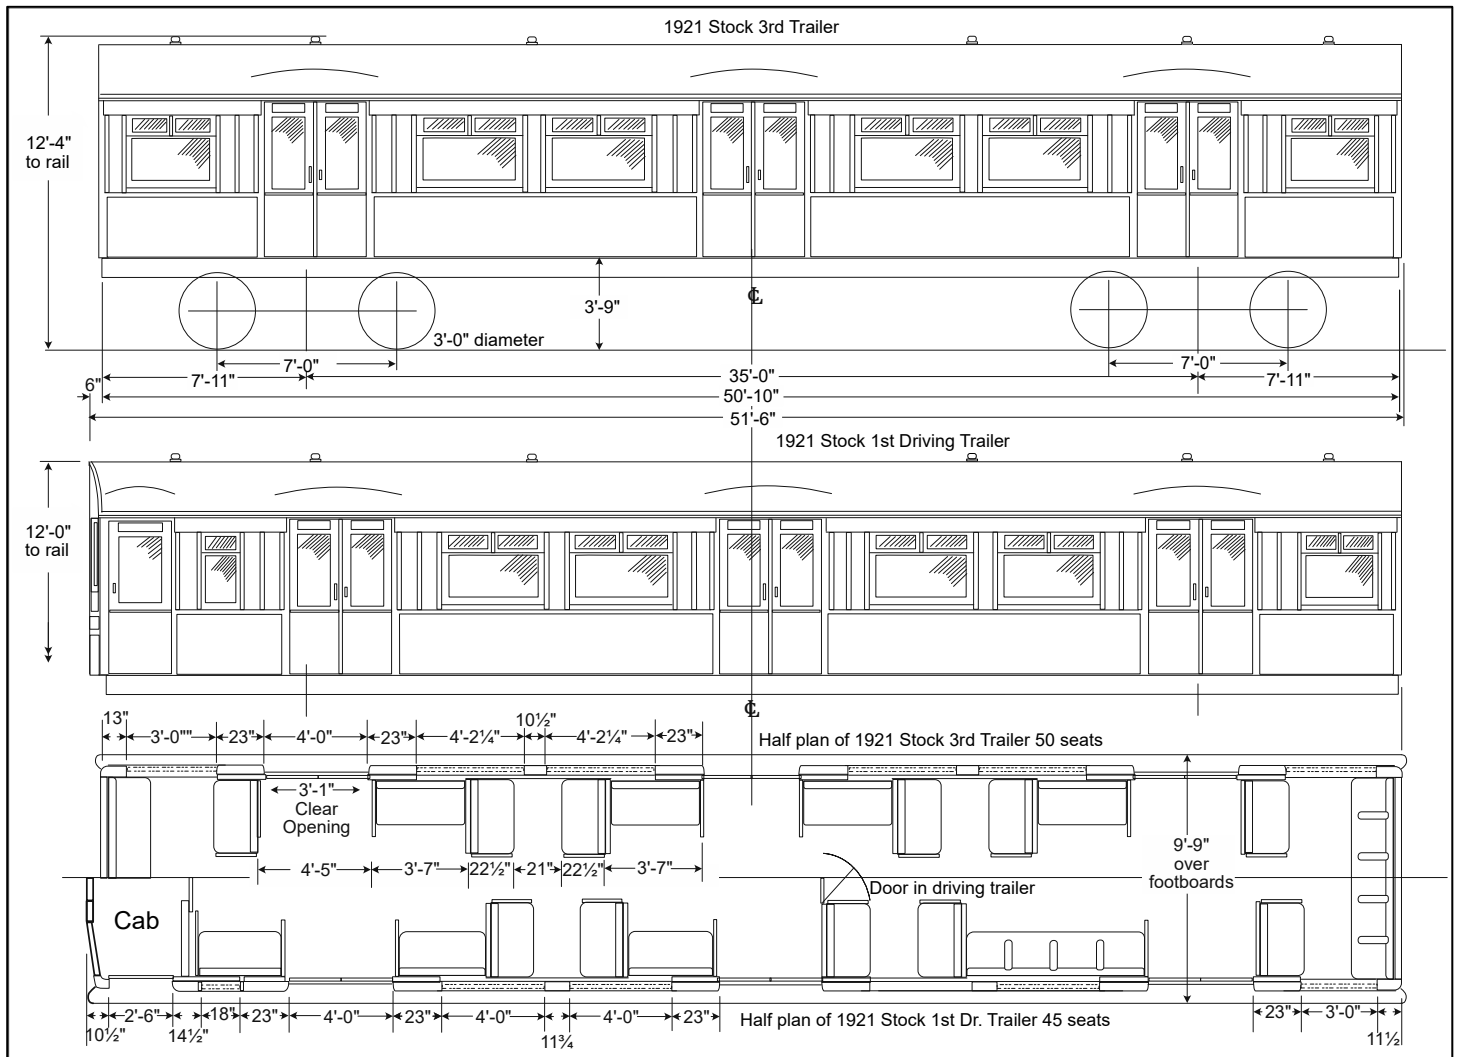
Side elevations and plans of 1921 Saloon Stock trailer cars. The top diagram shows the side elevation of the 3rd class trailer. The centre diagram shows the 1st class driving trailer, where the door and seating layout has been reconfigured to provide for a separate driver's cab. The interior is partitioned to divide the car into smoking and non-smoking areas. The bottom diagram shows half plans for both types of trailer car and demonstrates the differences between them. The 3rd class trailer had 50 seats while the 1st class driving trailer had 45 seats. Drawing: P. Connor.
